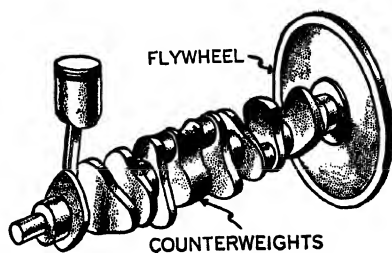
Crankshaft for a high-speed automotive type gasoline engine. (Courtesy General Motors Corp.)
